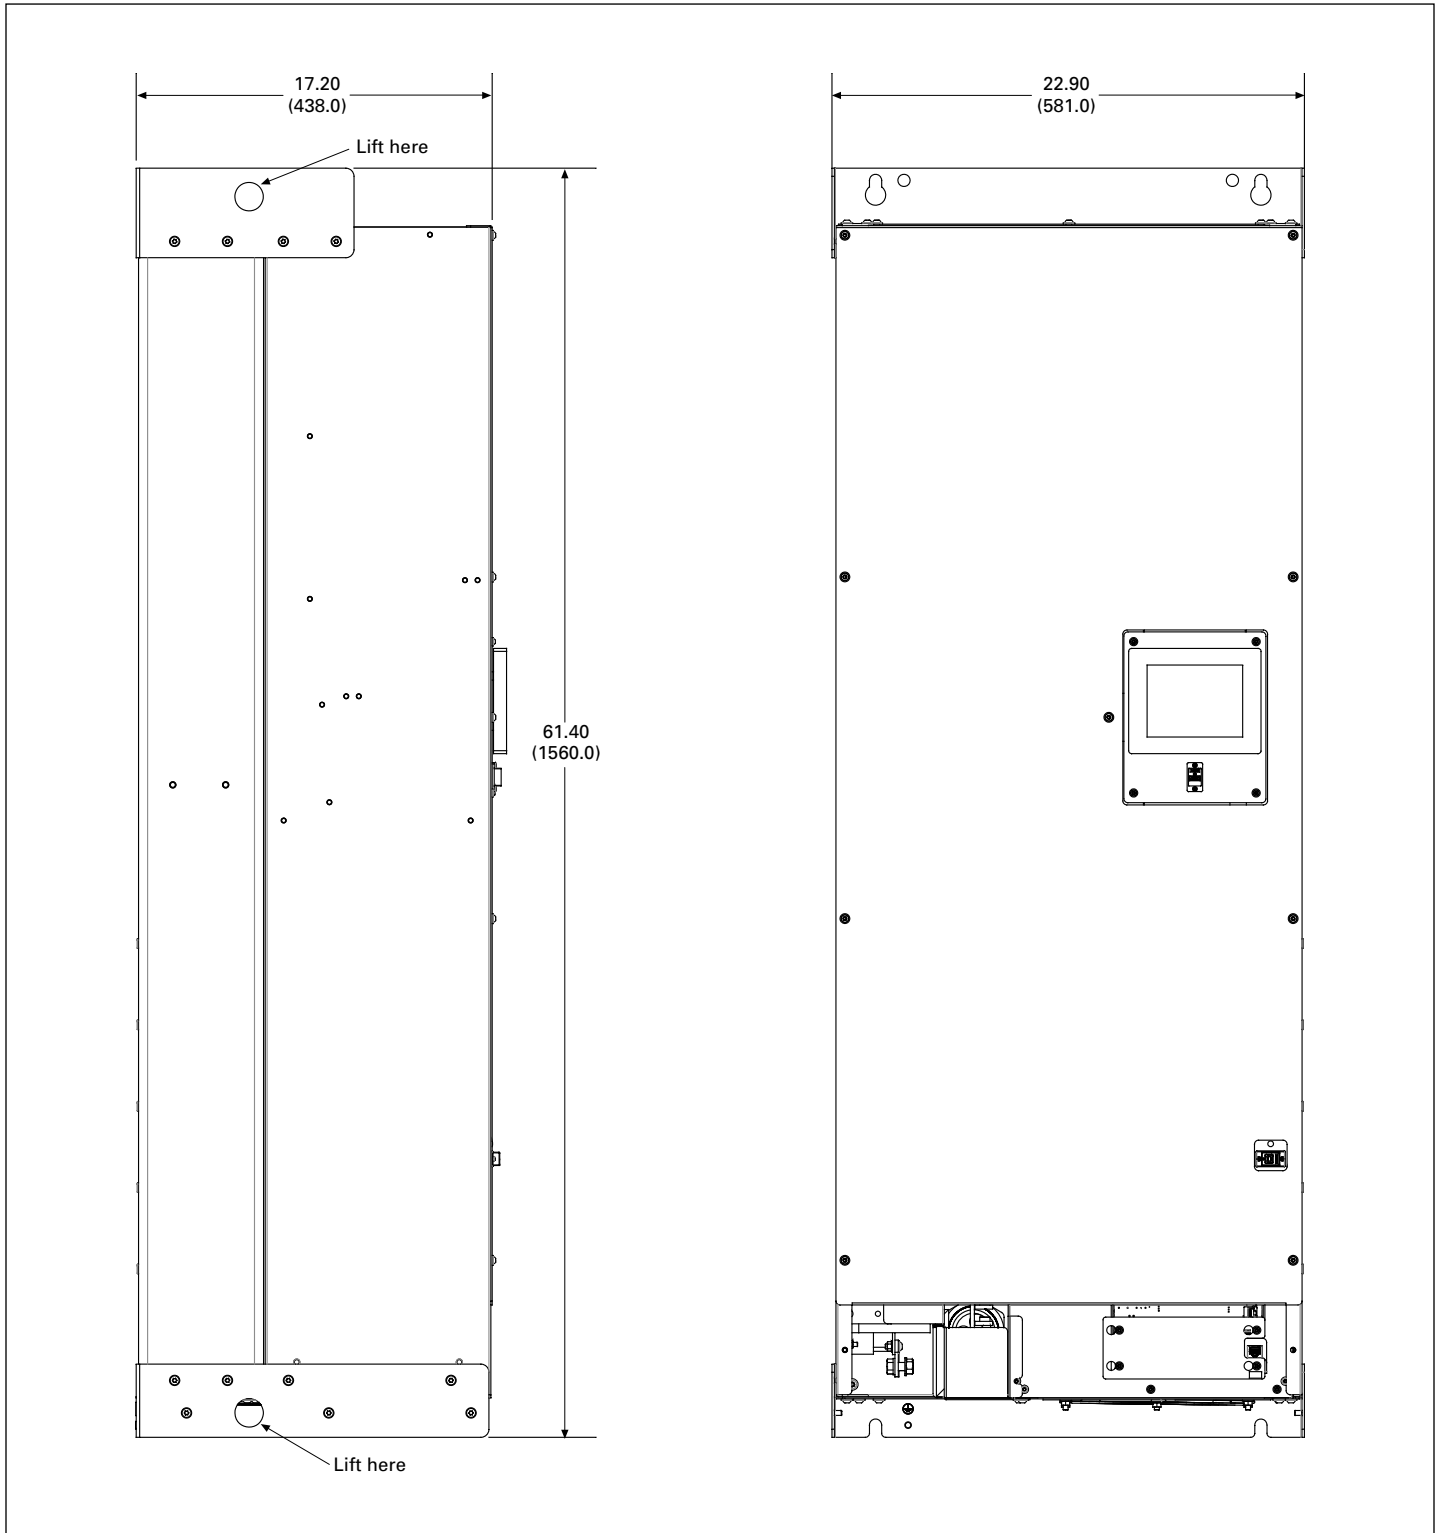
Chassis mount 300 A—dimensions in inches (mm)
